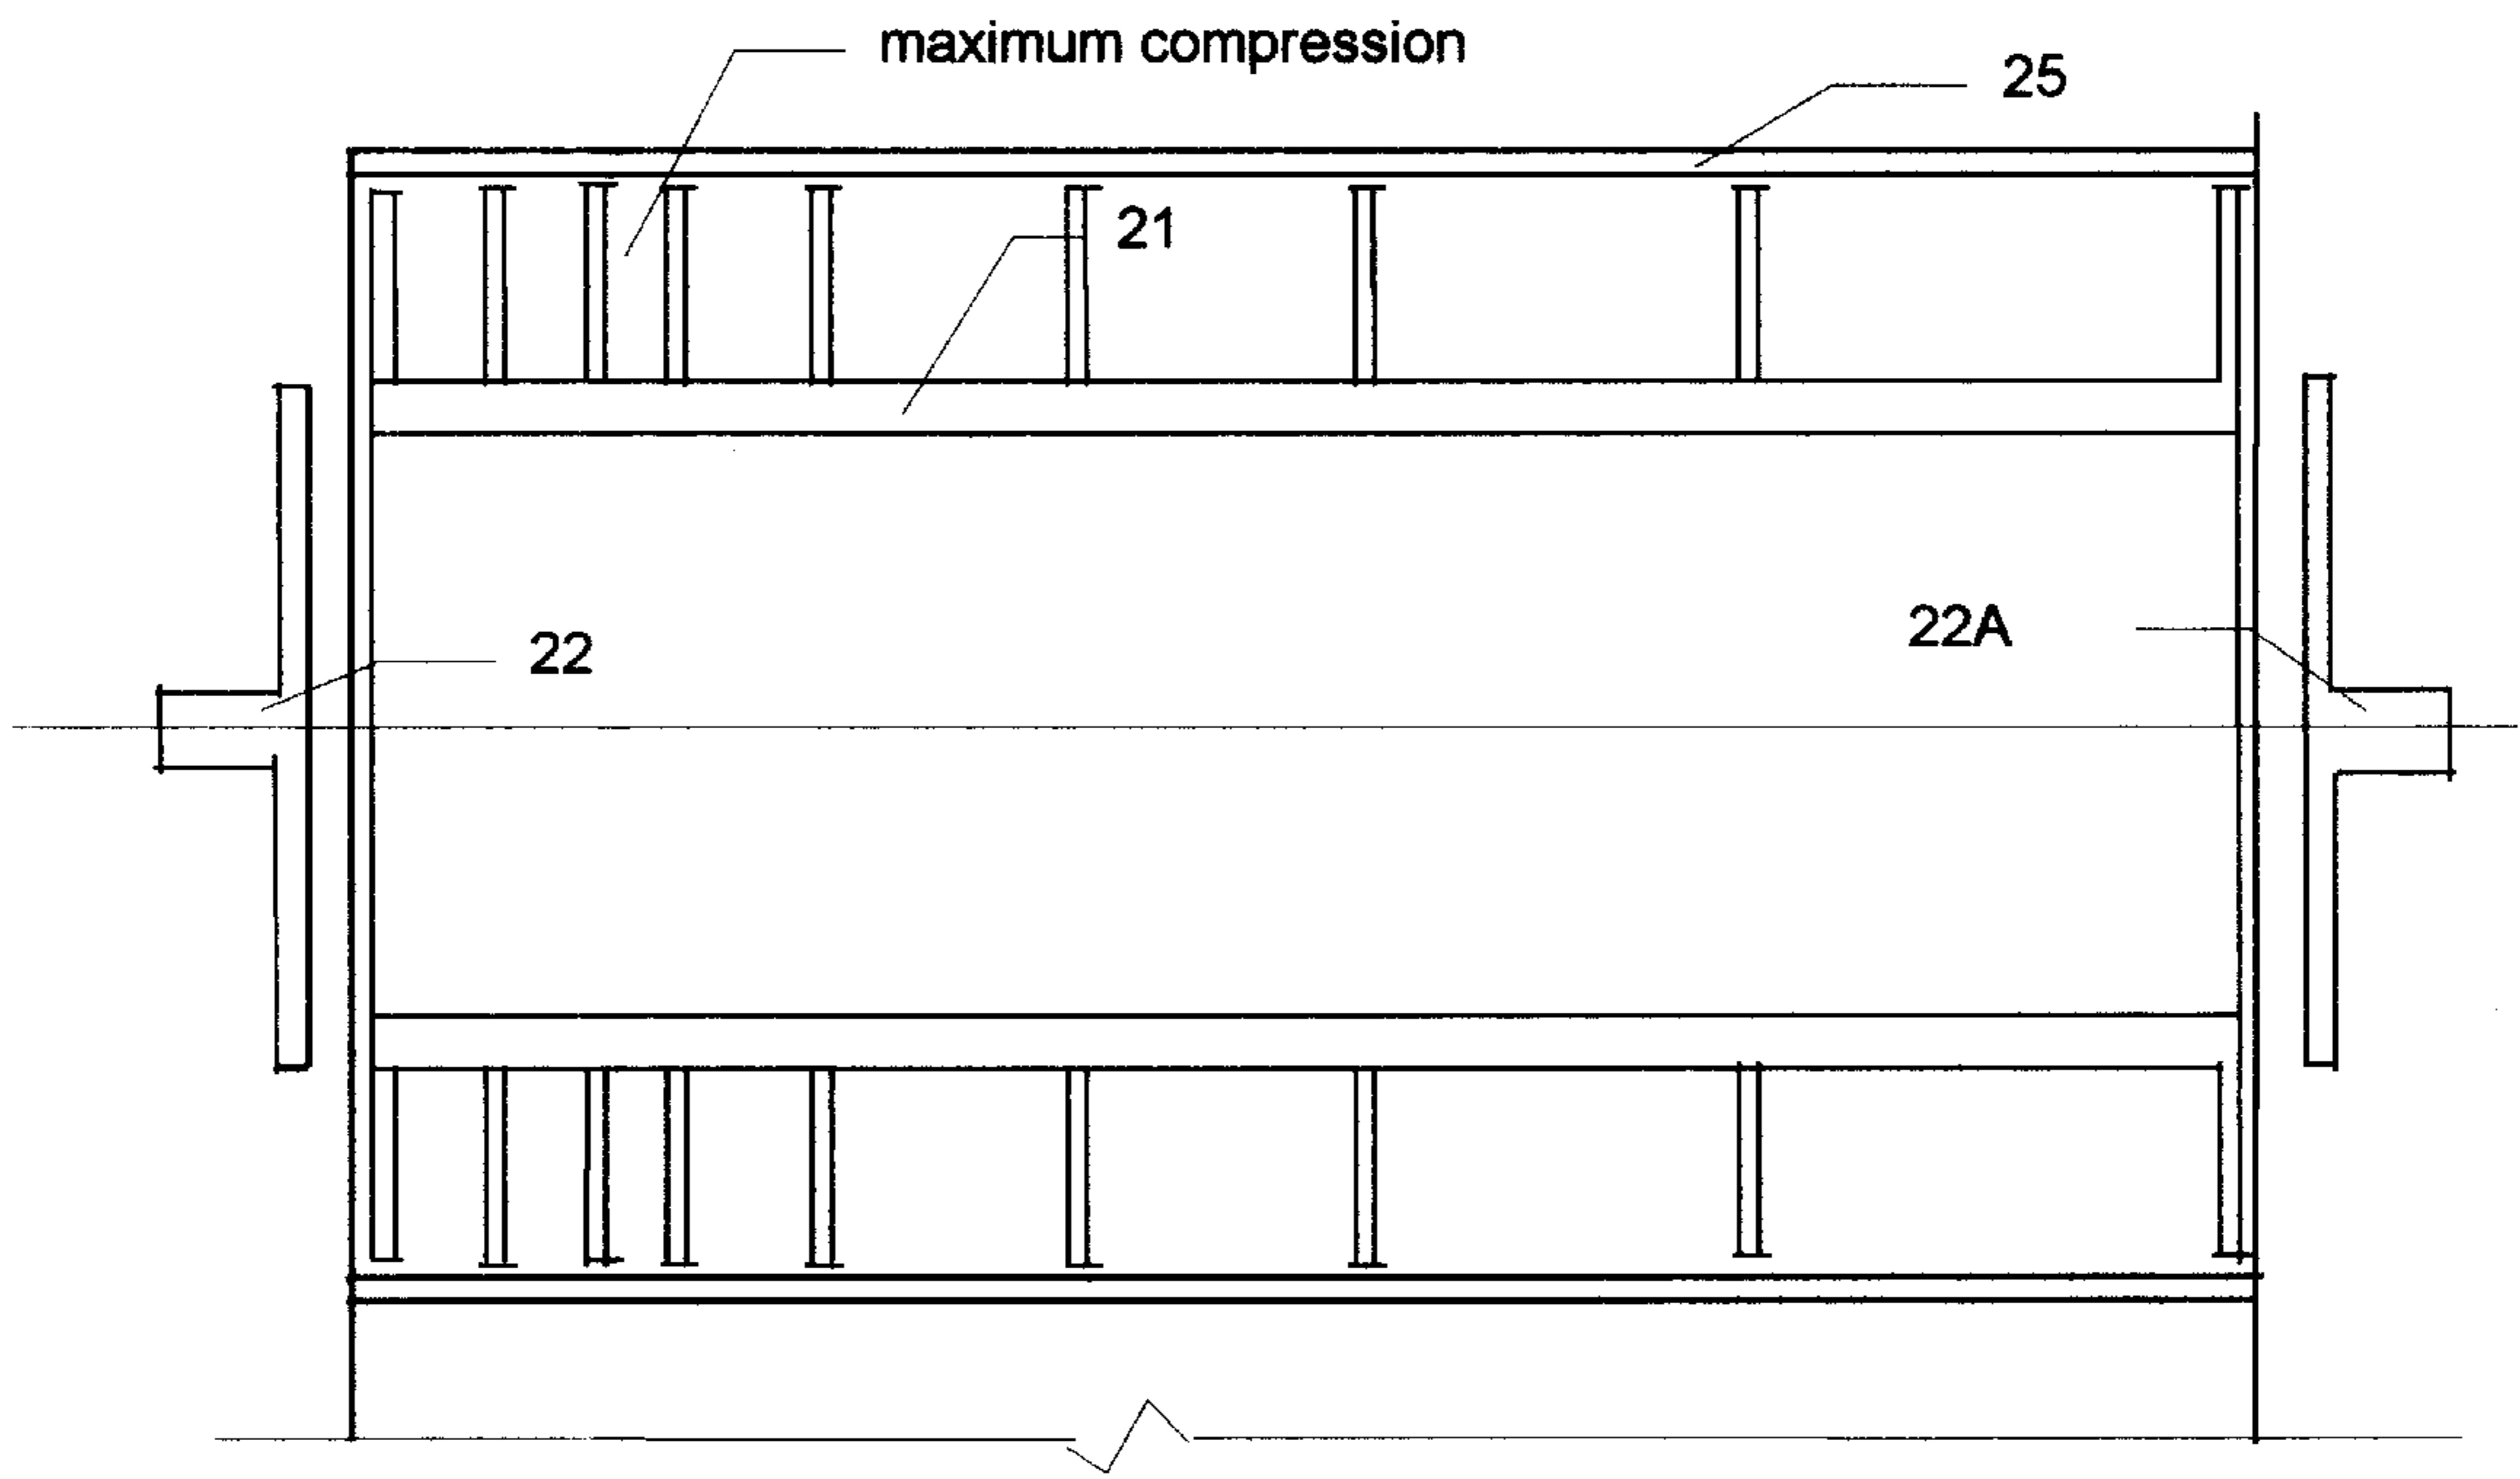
Axial Cross Section Expander Assembly ICE Embodiment
